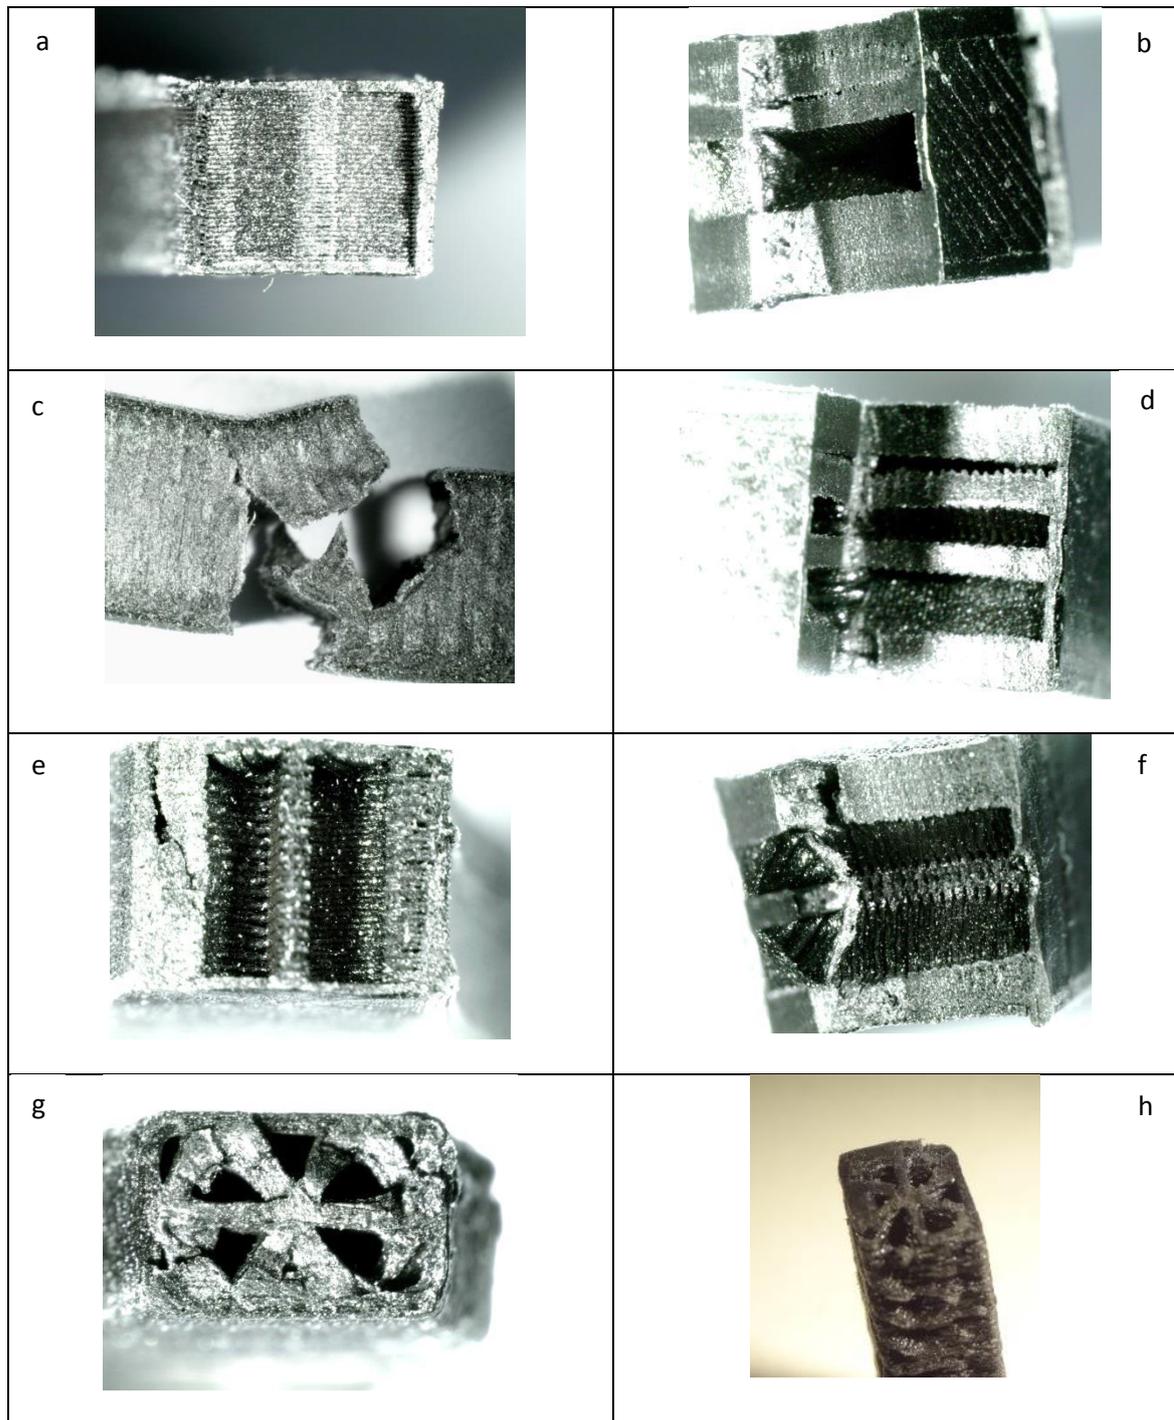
Fracture surface/internal structure of the specimen types. a) Fracture surface of test specimen EDA-OB-5-3, b) cross-section of test specimen EDA-OB-5-2, c) side view of fracture of EDA-OB-6-3, d) cross-section of test specimen EDA-OB-6-3, e) fracture surface of EDA-OB-7-3, f) cross-section of test specimen EDA-OB-7-6, g) fracture surface of test specimen EDA-OB-8-2, h) cross-section of test specimen EDA-OB-8-2
